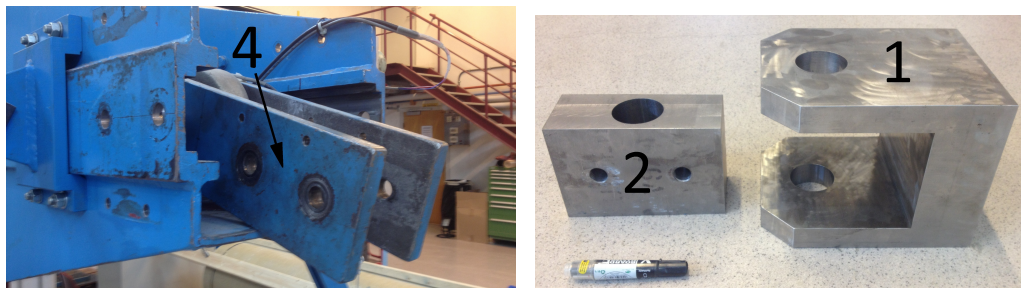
Photo of fork (1), block bearing (2) and flange (3)
